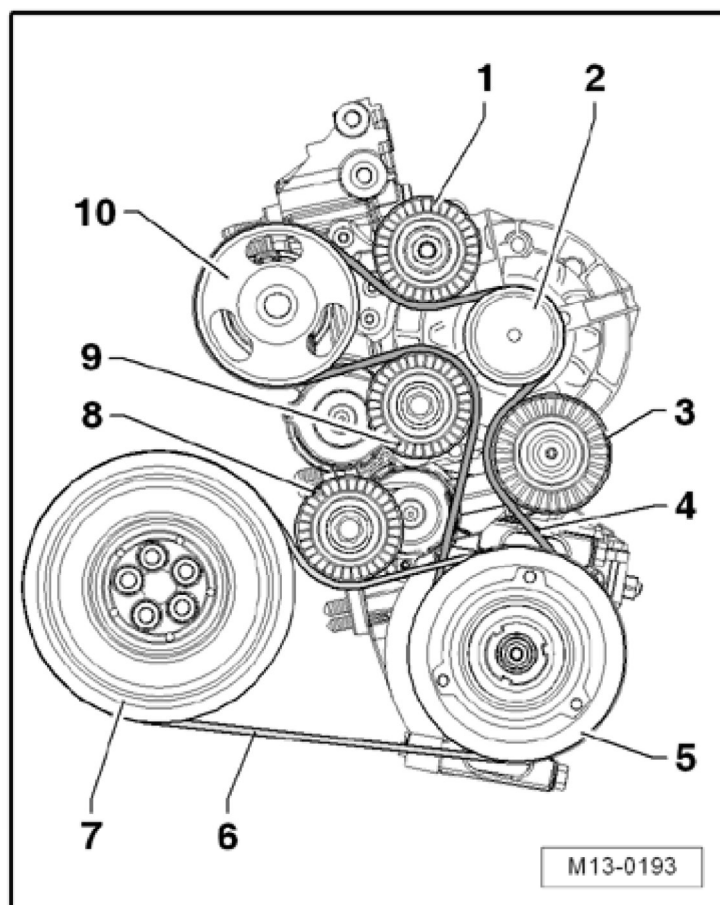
Identifying Ribbed Belt Routing 2.5L 5-Cylinder Gasoline Engine
